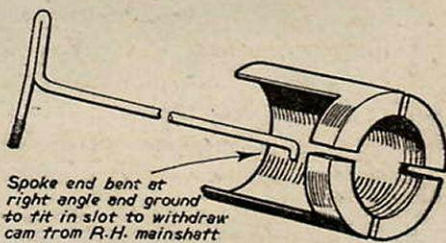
To withdraw the contact-breaker cam, the tool illustrated must be made. An old bicycle spoke is ideal for the purpose.
